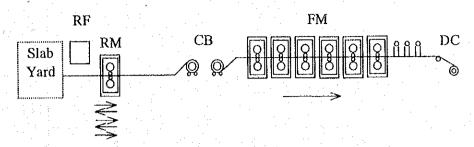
Schematic Drawing of Roughing Mill
